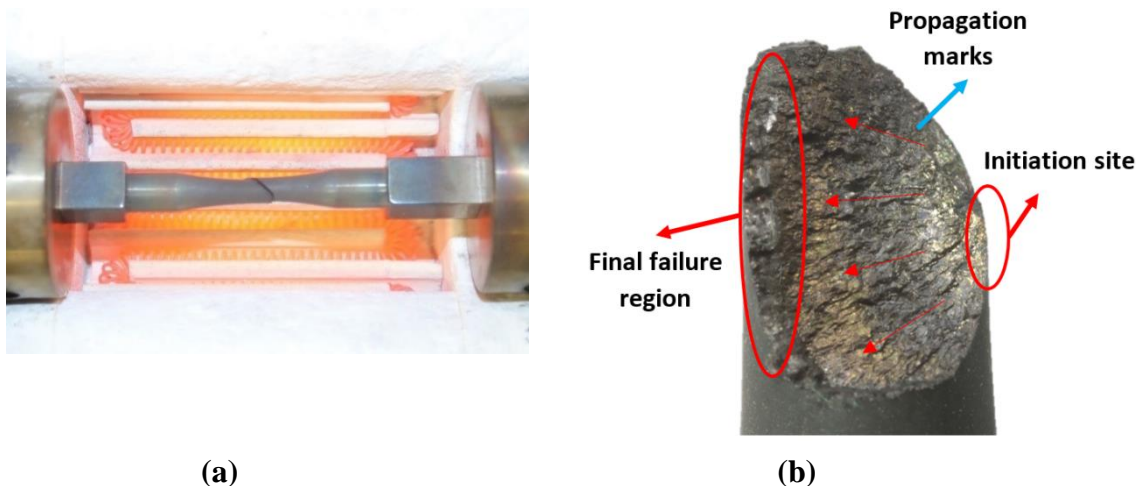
Detailed image of high cycle torsional fatigue of Inconel 617 specimen at 850°C: a) Broken specimen in a test, b) fracture surface of the specimen
